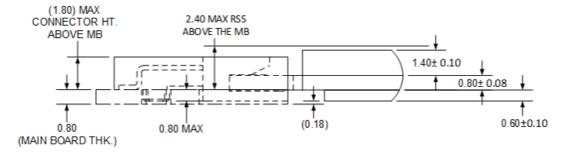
Stack-up Mid-mount (In-line) Double-sided (D4) Module for 1.5 Maximum Top-side Component Height
